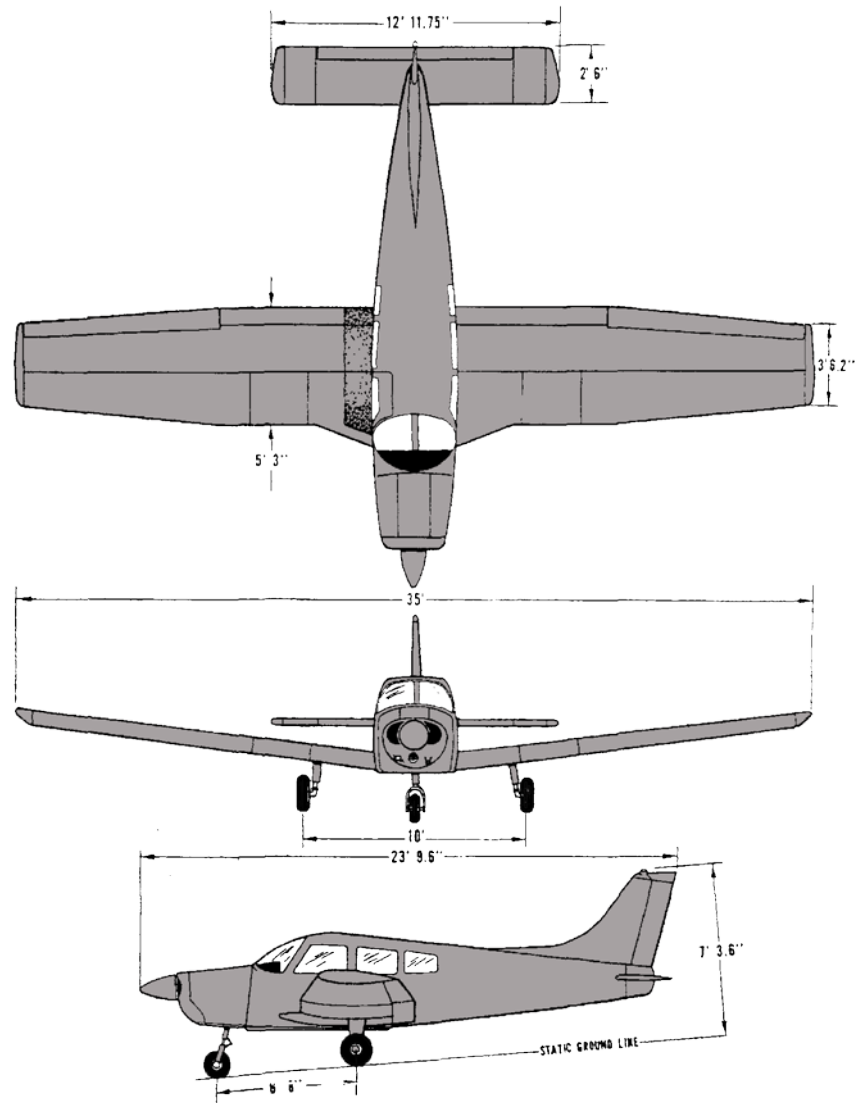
Three-view drawing of the aircraft type. Image: Piper Warrior Information Manual.
